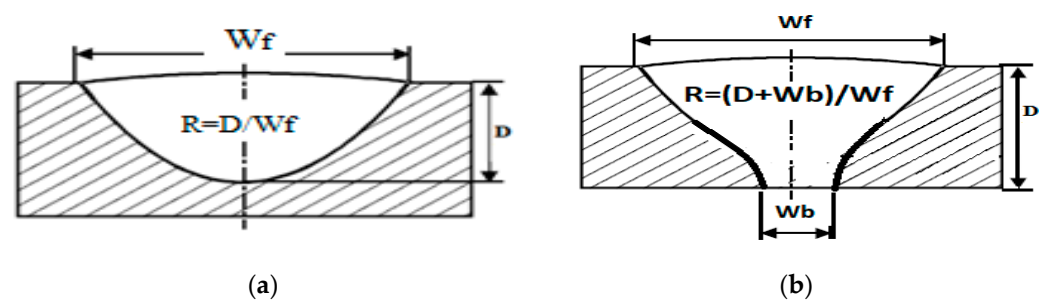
Ratio expressions for a partial-penetration weld bead (a) and full-penetration weld bead (b).
